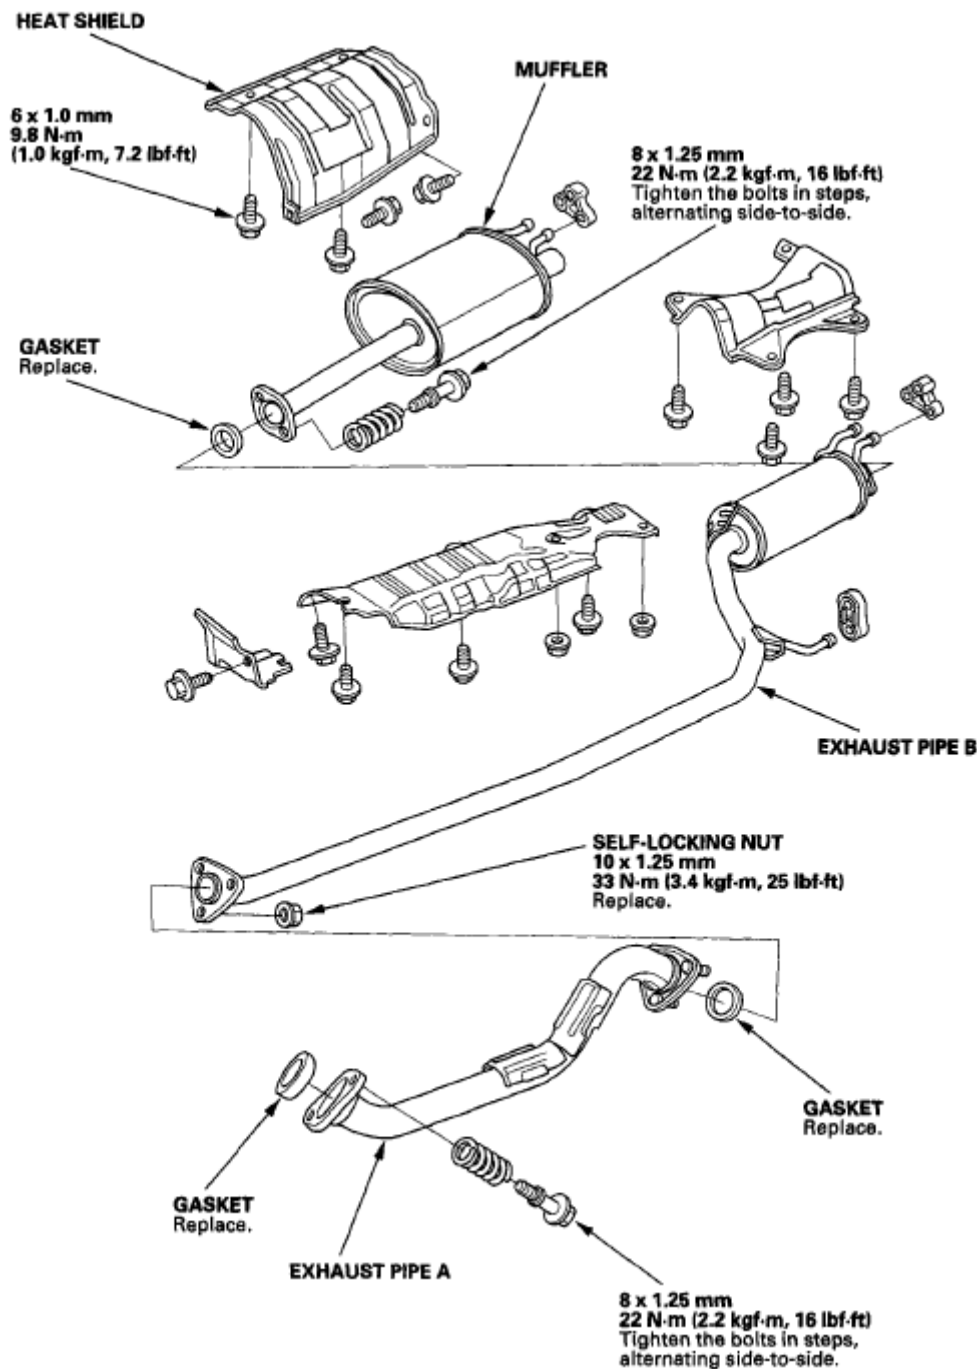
Identifying Exhaust Pipe And Muffler Components (With Torque
